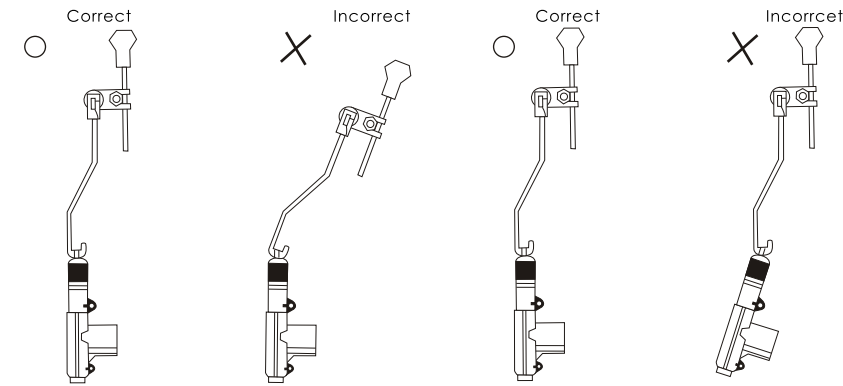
ASSEMBLING & INSTALLATION OF ROD
